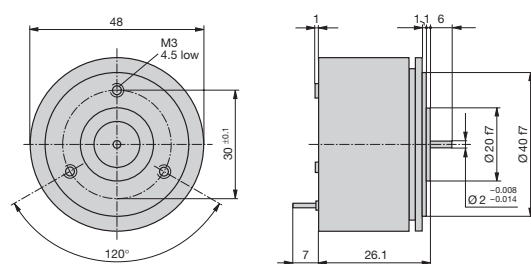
KINAX 3W2 with standard drive shaft at front only,
